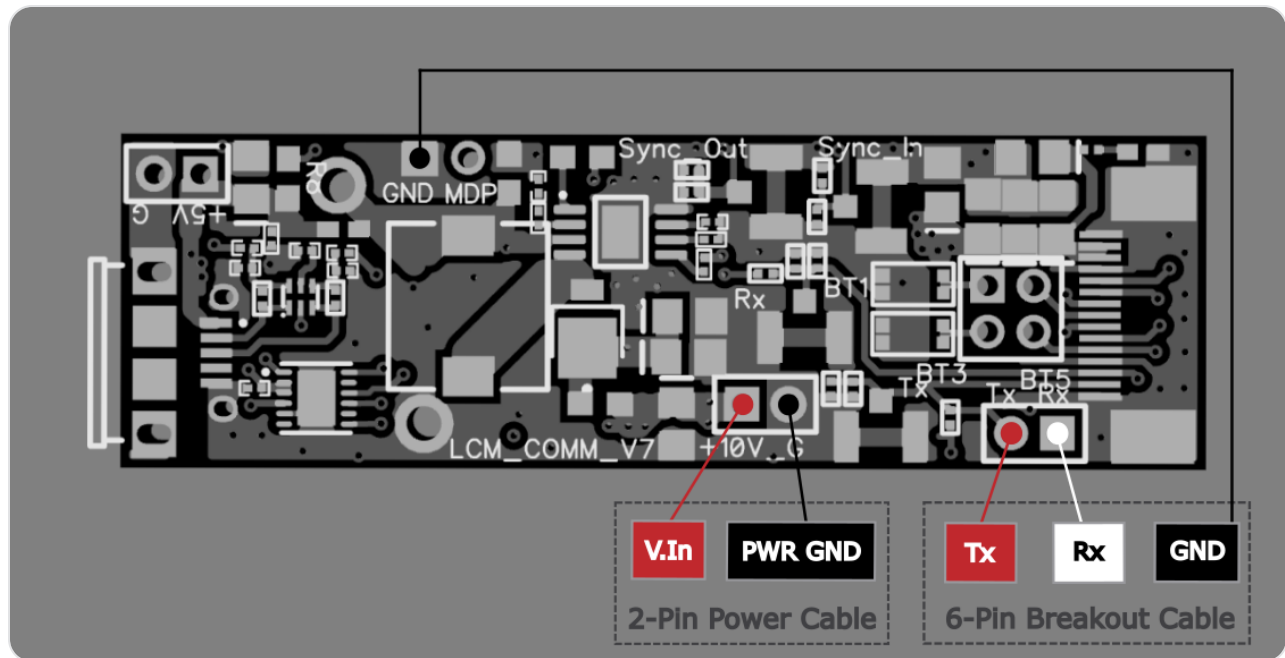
Wiring the spare 2-pin power cable (V.In, PWR GND) and 6-pin breakout cable (Tx, Rx, GND) to a standard Comms board for USB power and the external serial link.
